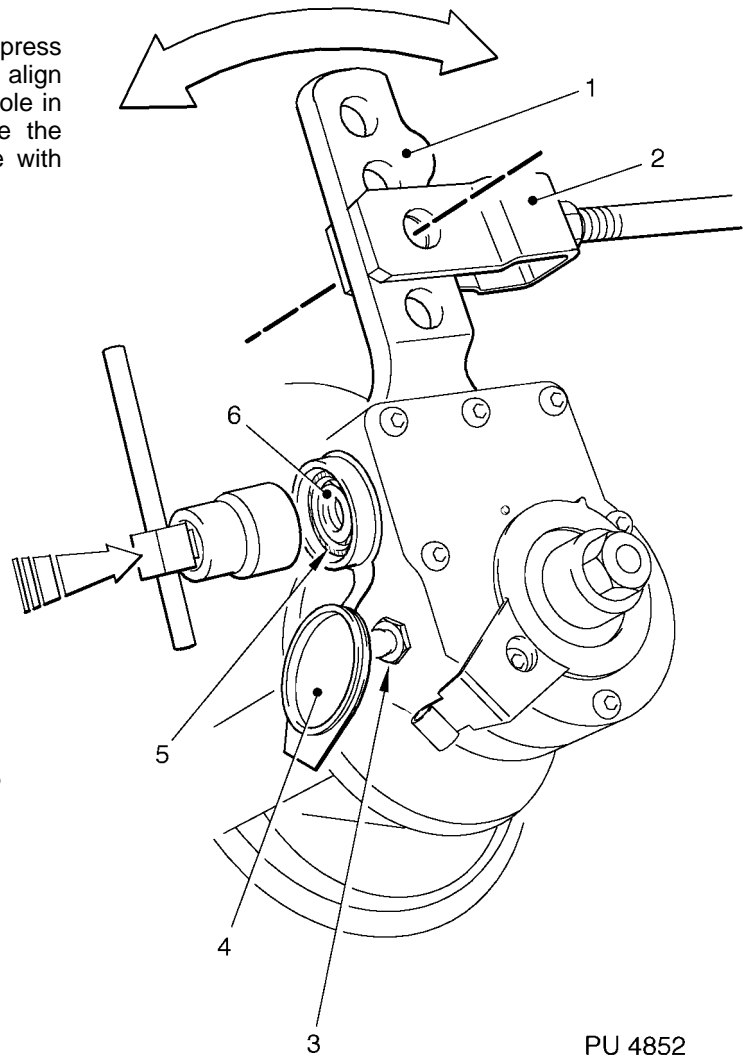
BRAKE LEVER / ACTUATOR ROD ALIGNMENT
